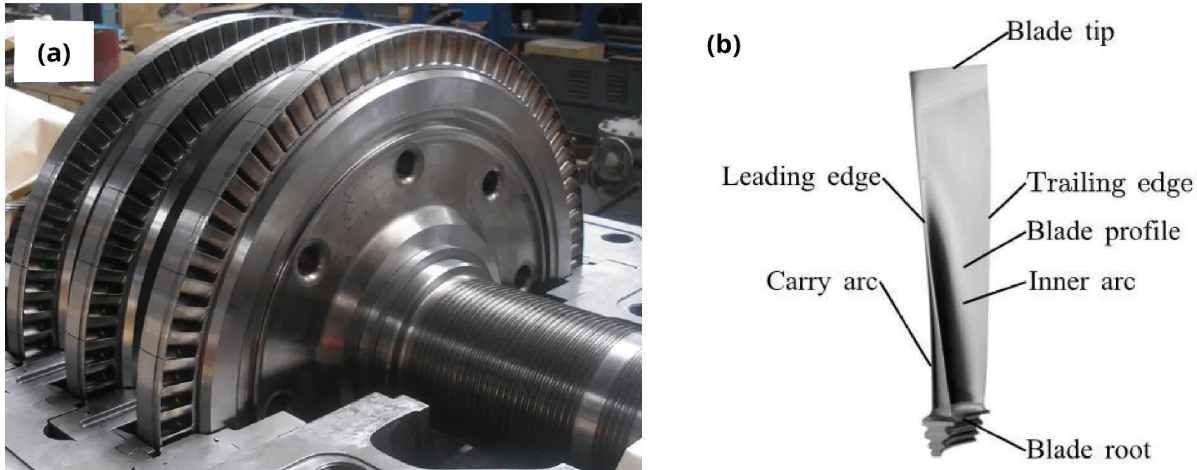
Turbine blades: (a) The shaft and disc with turbine blades, (b) Basic structure of a twisted blade
